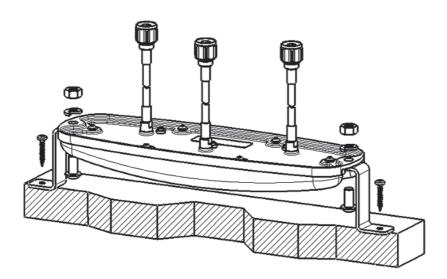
Reverse mounting on the ceiling using the mounting accessory
